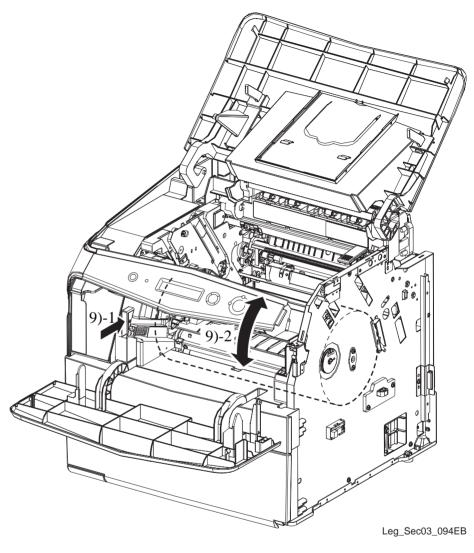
Removal of HOUSING ASSY-DEVE (1)
